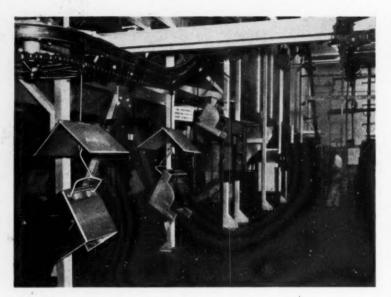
A view of one of the Ballard conveyor stoving ovens in the paint finishing shop
